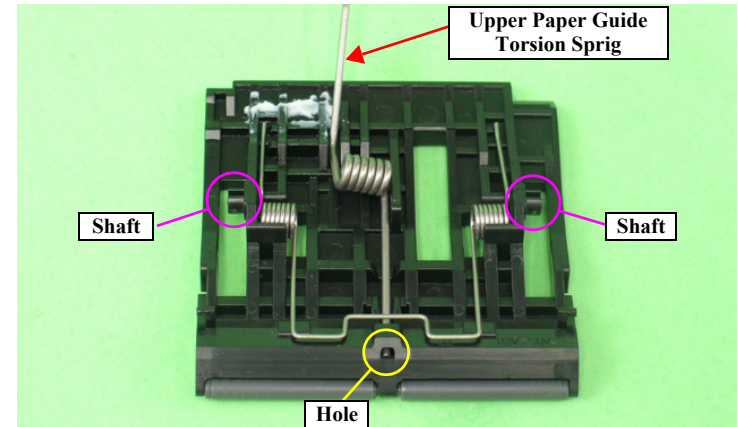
Installing the Upper Paper Guide Torsion Spring
